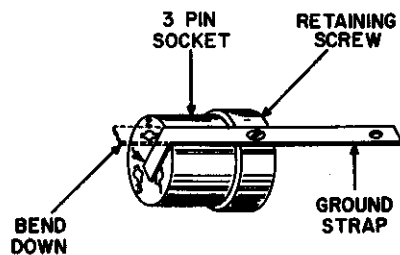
HOW TO ASSEMBLE THE PROBE HEAD
